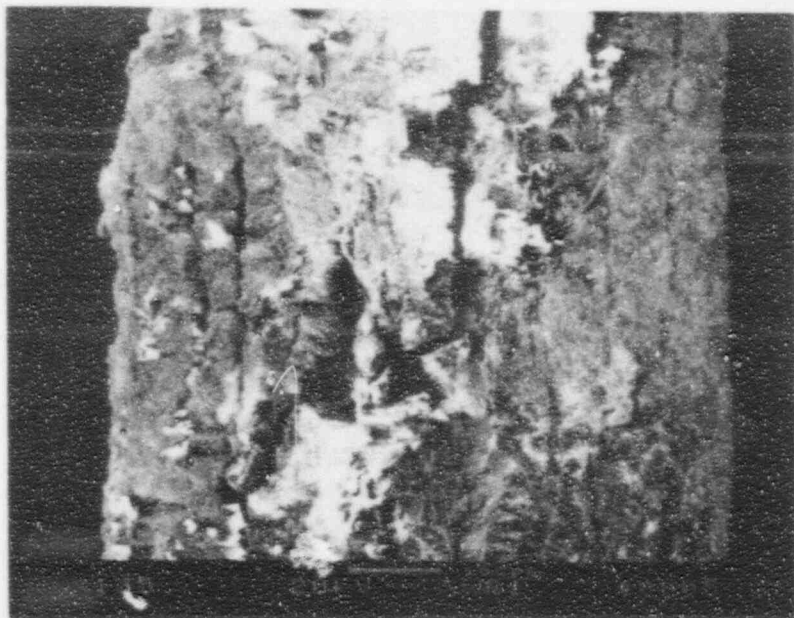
SEM Fractographs of SwRI Wire No. 421-1
